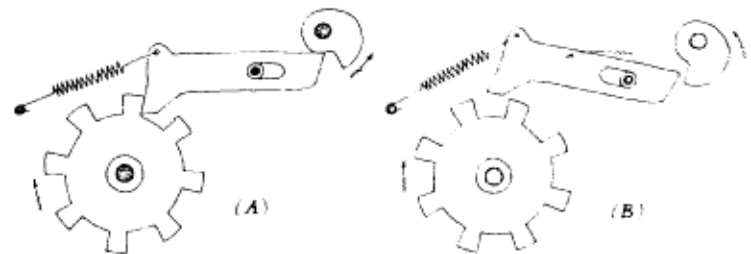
Single-pallet machine escapement. (A) Engaged. (B) Disengaged.
